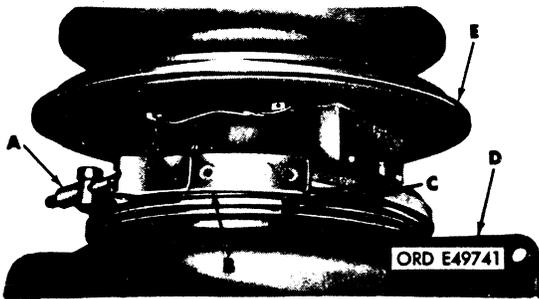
REMOVING BEARING HOUSING ASSEMBLY AND RELATED PARTS - TURBOCHARGERS 10912638 AND 53591-C-139552.
